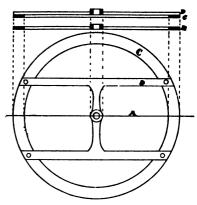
PLAN AND SECTION OF FIFTH WHEEL.
